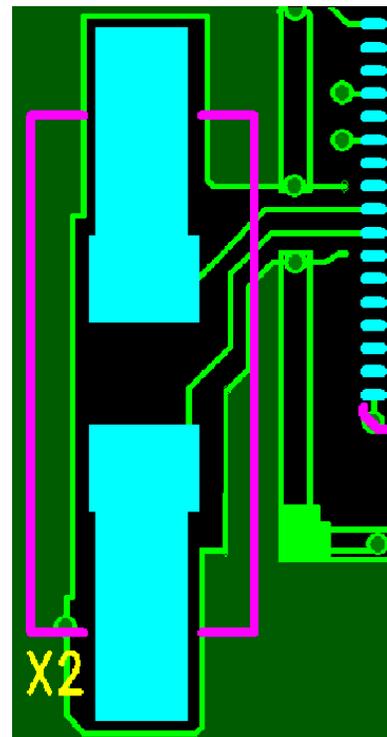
PCB Top Metal Layer Shielding of Crystal Signals
